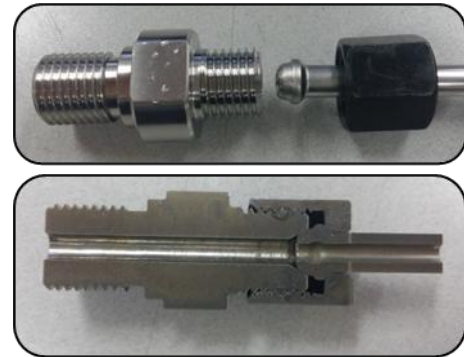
Parts assembly and sectional shapes of metal-sealing structures
